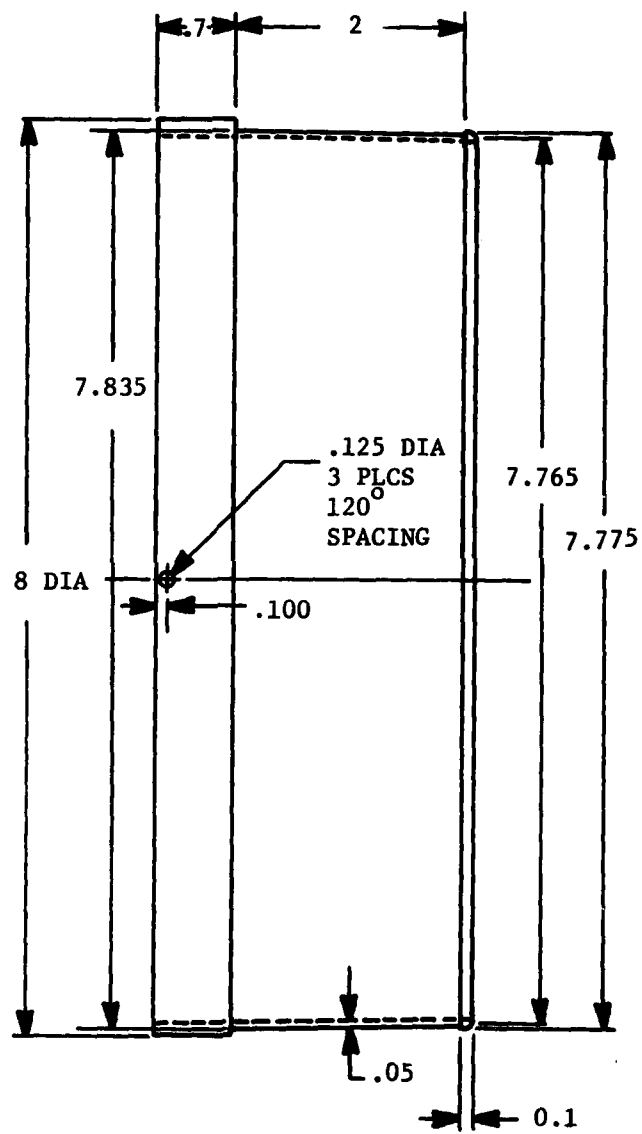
Test Bobbin 10, Spool Geometry
